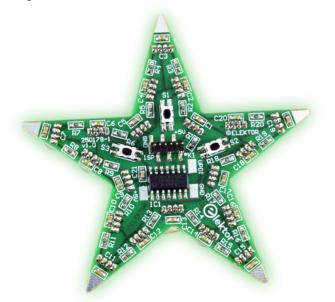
Bottom side of the populated PCB of the Christmas Star 2025.
